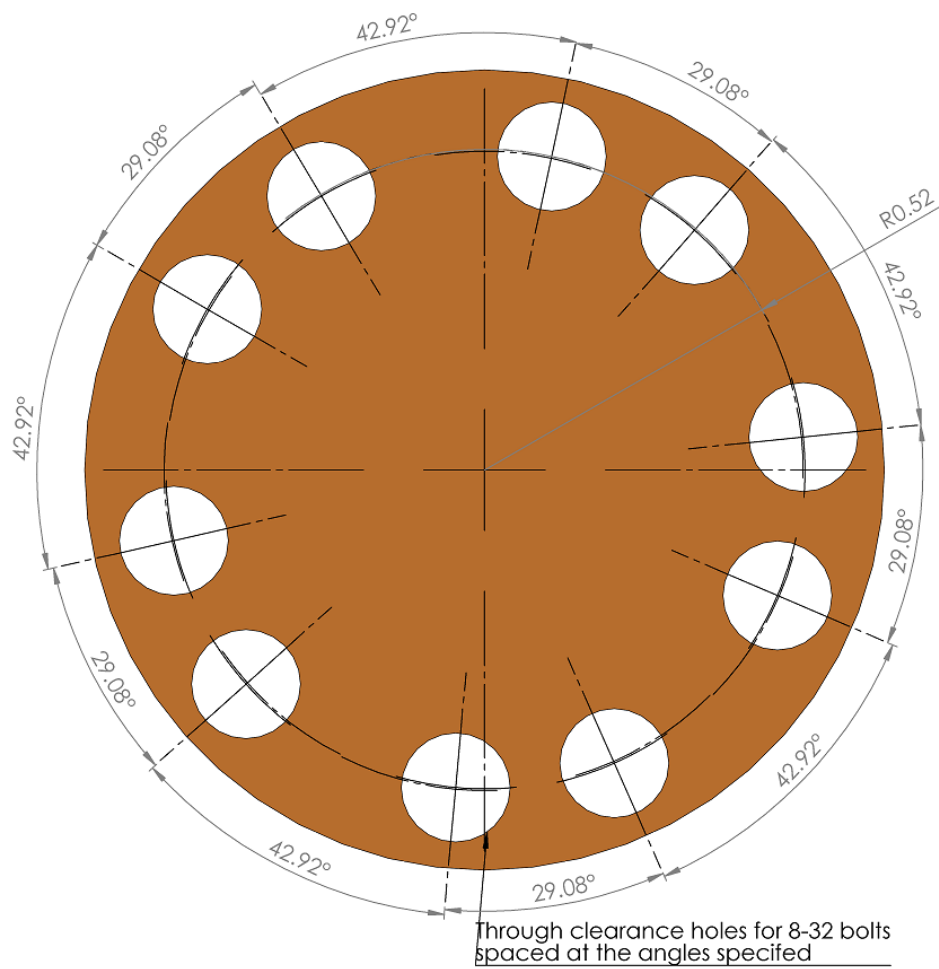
Sintered silver heat exchanger box bottom piece machined out of stainless steel
